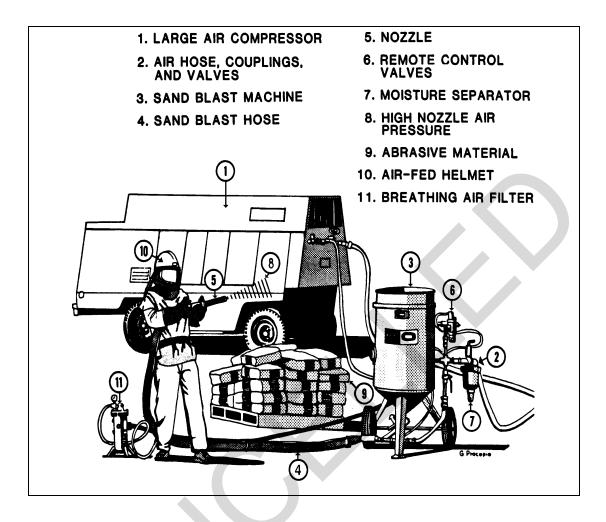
Schematic Drawing Illustrating Components of Conventional Abrasive Blasting Equipment
